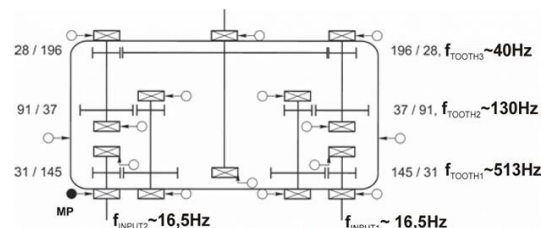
The Kinematics scheme of cement mill gearboxes with numbers of teeth, the tooth frequencies and one of the measure points (MP).
